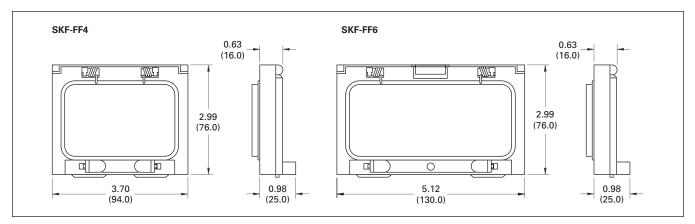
EZSKF-FF4 and EZSKF-FF6 Series Dimensions in Inches (mm), Drawing Number MD05013014E
